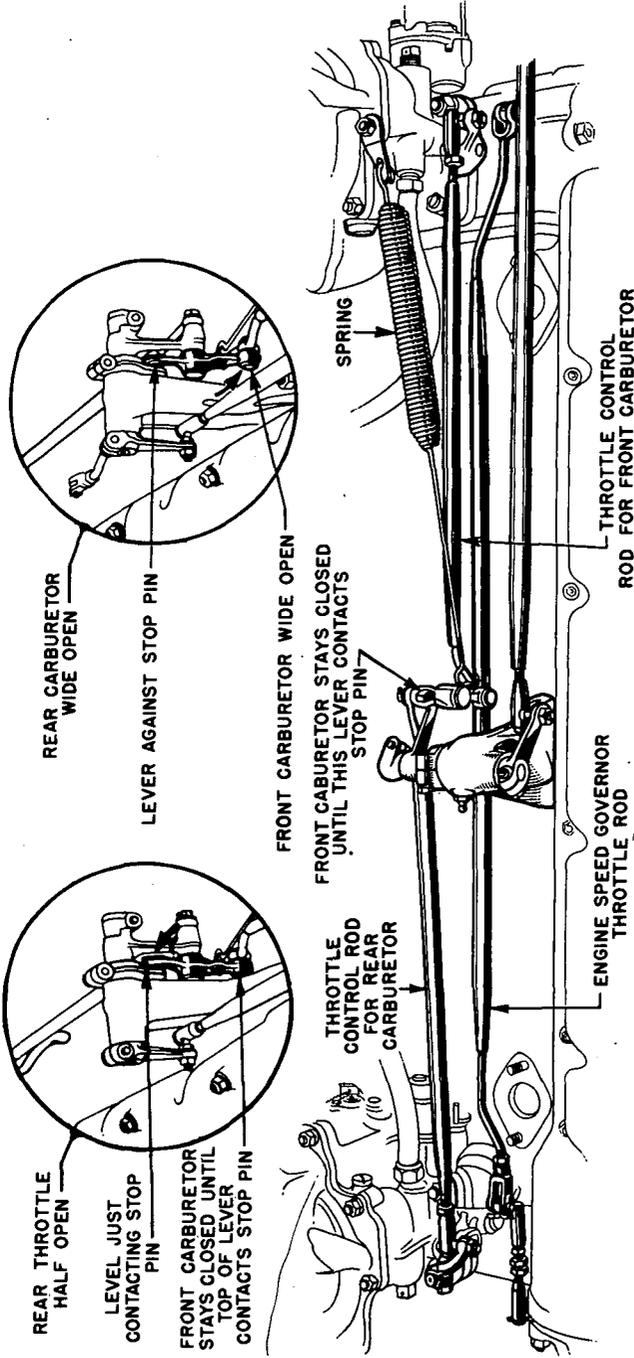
Carburetor Throttle Linkage on GAA Engine
